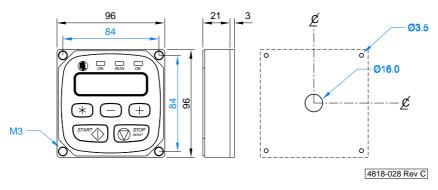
Remote Display Dimensions and Cutout Pattern
